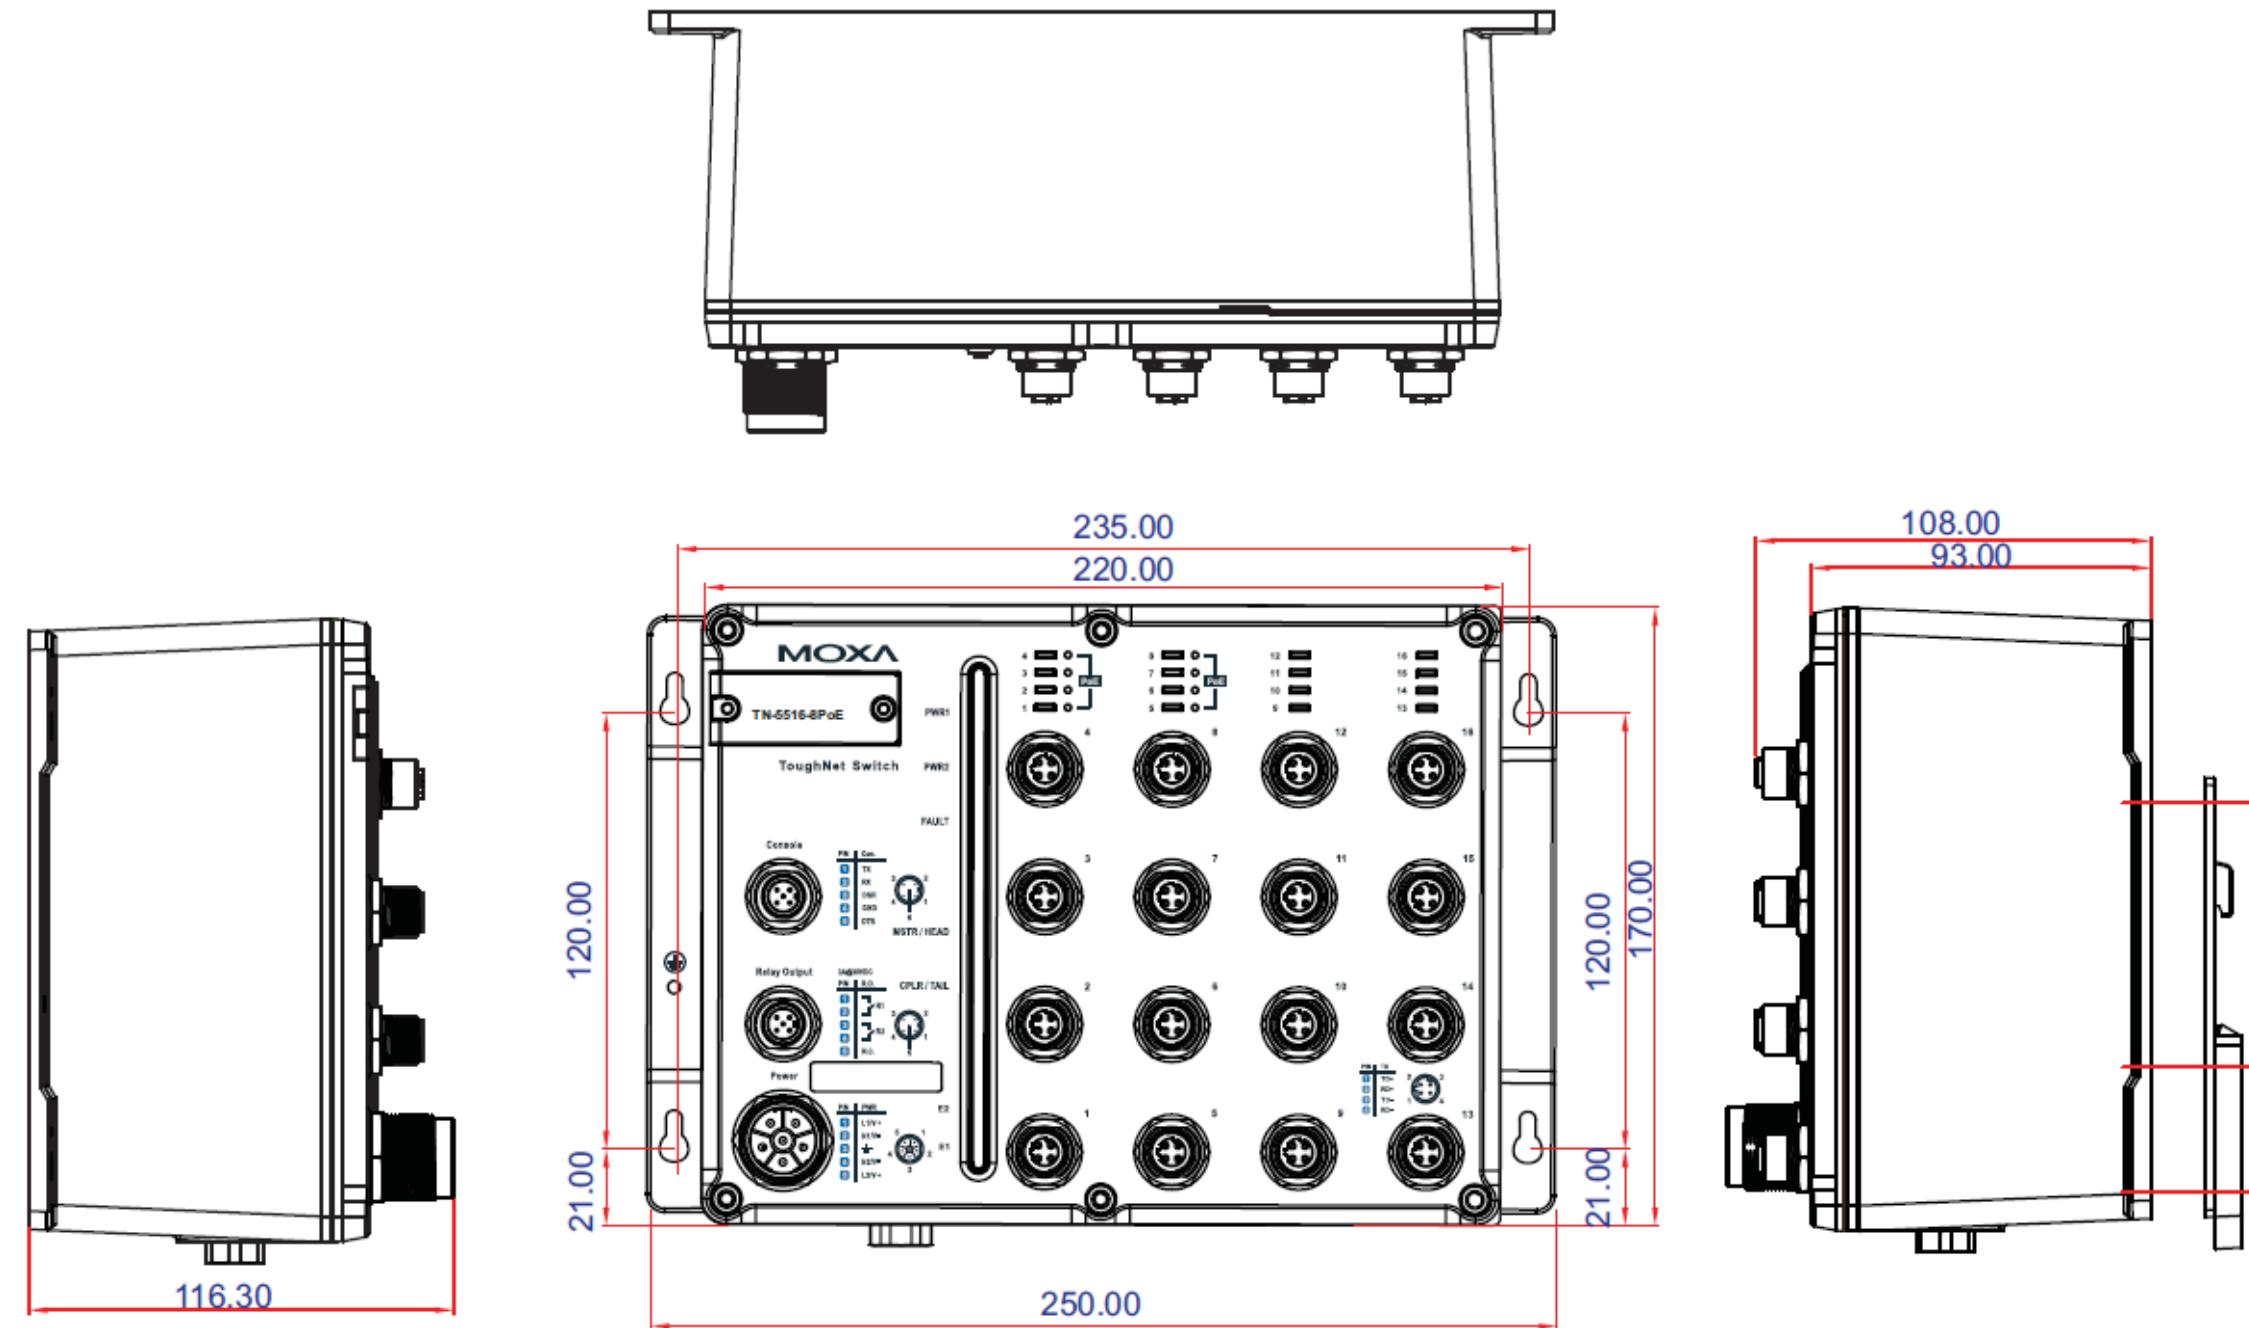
Moxa Ethernet Switch Assembly Drawing
